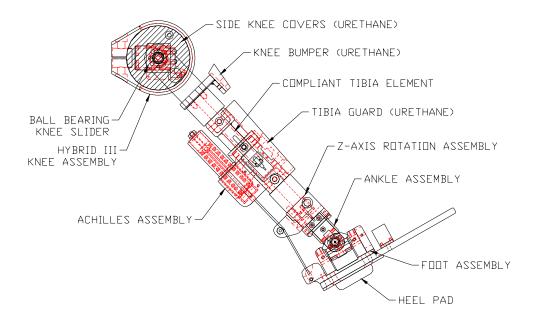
Thor-FLX/HIIIr schematic drawing with labeled key element and sub-assemblies
